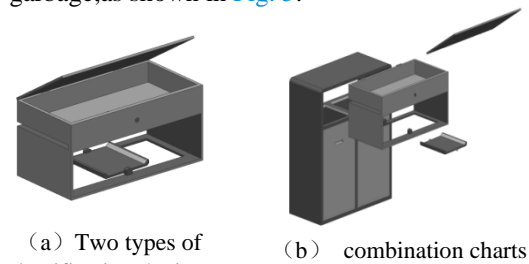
Exploded view of installation of two types of garbage sorting devices
